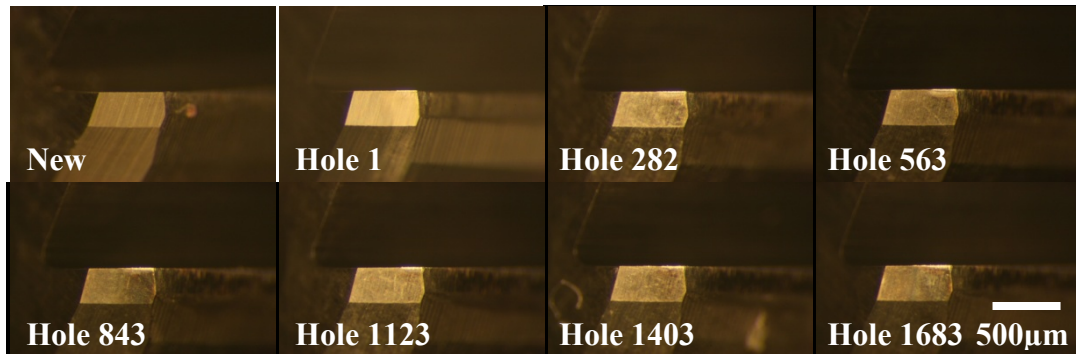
Tool wear micrographs of uncoated carbide reamer under 70bar through-hole cutting fluid, 32m/min cutting speed (Test 1)
